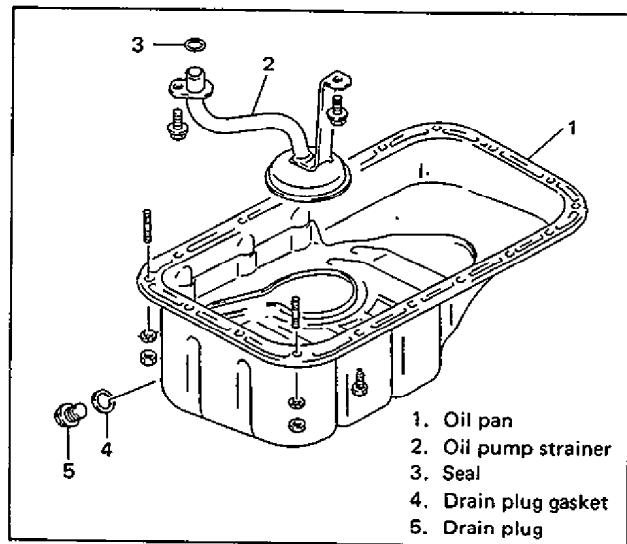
A-41 Oil Pan and Oil Pump Strainer
